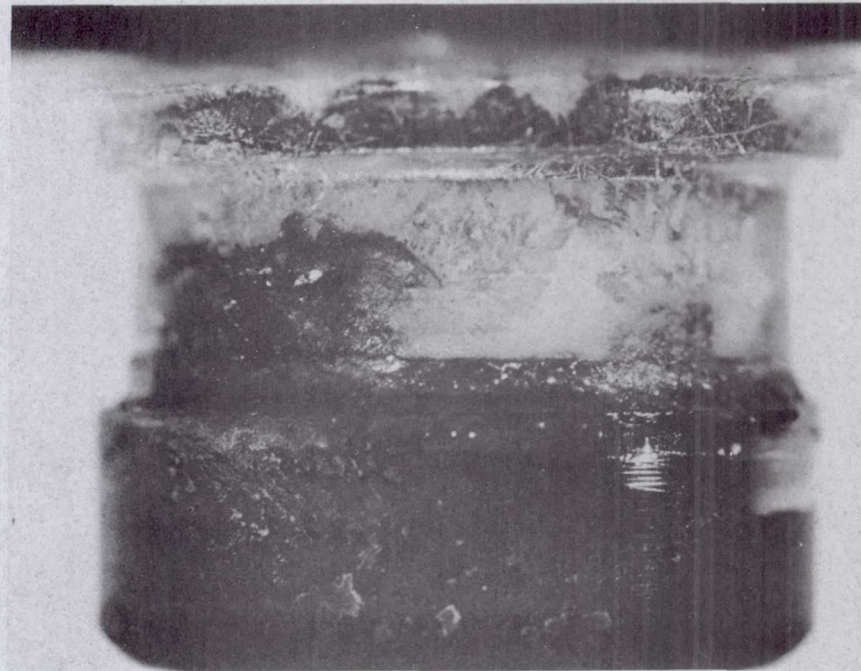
Terminal Seal of Figure 14 After 6 Months on Corrosion Test
